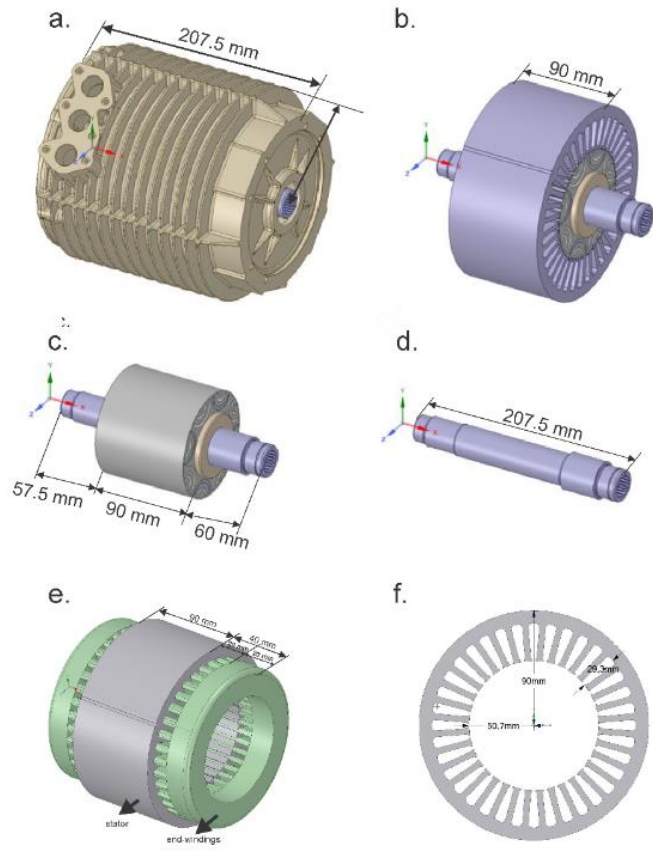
The 3D geometry of the interior permanent magnet IPM motor: (a) stator, rotor and shaft with the housing; (b) stator, rotor with magnets and the shaft; (c) rotor with magnets and shaft; (d) shaft only; (e) stator with windings; (f) dimensions of the stator lamination
